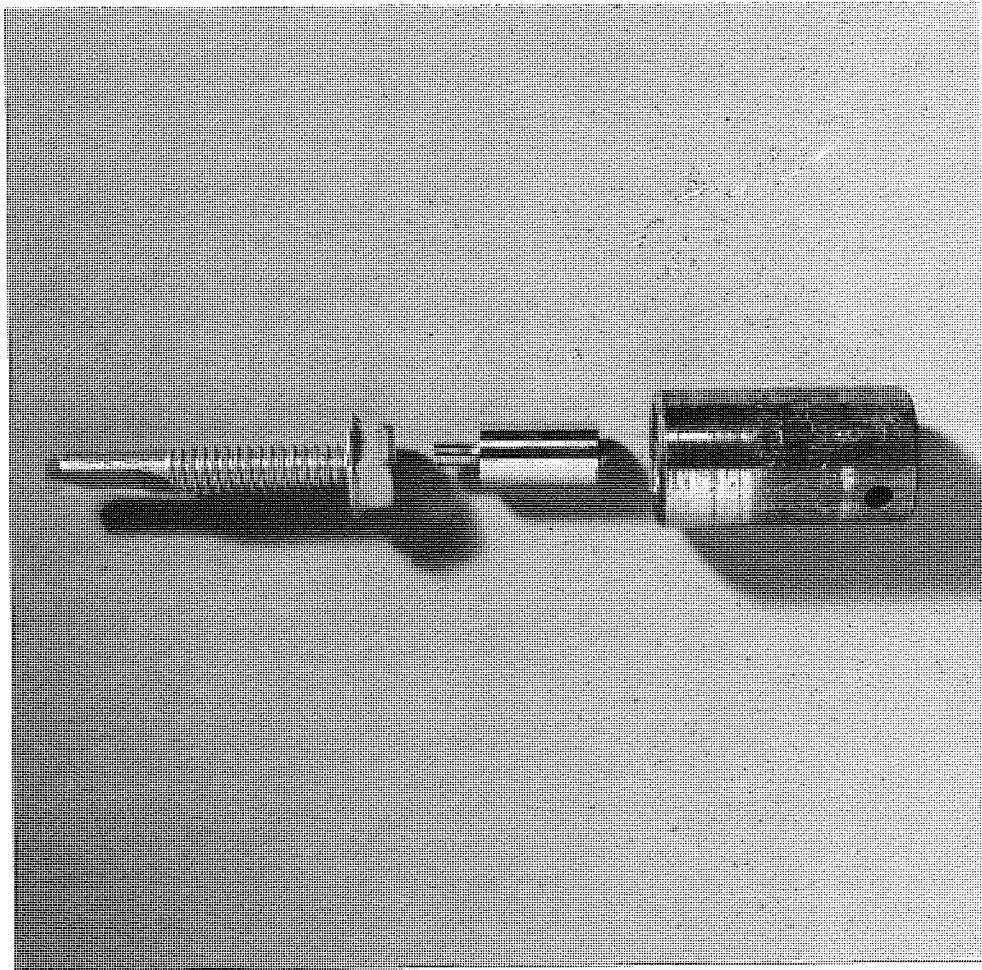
HAND HELD POWER TOOL - DRILL SCREW SET UP FOR IMPROVED HEAD SUPPORT WITH SOCKET CENTRE PIN
